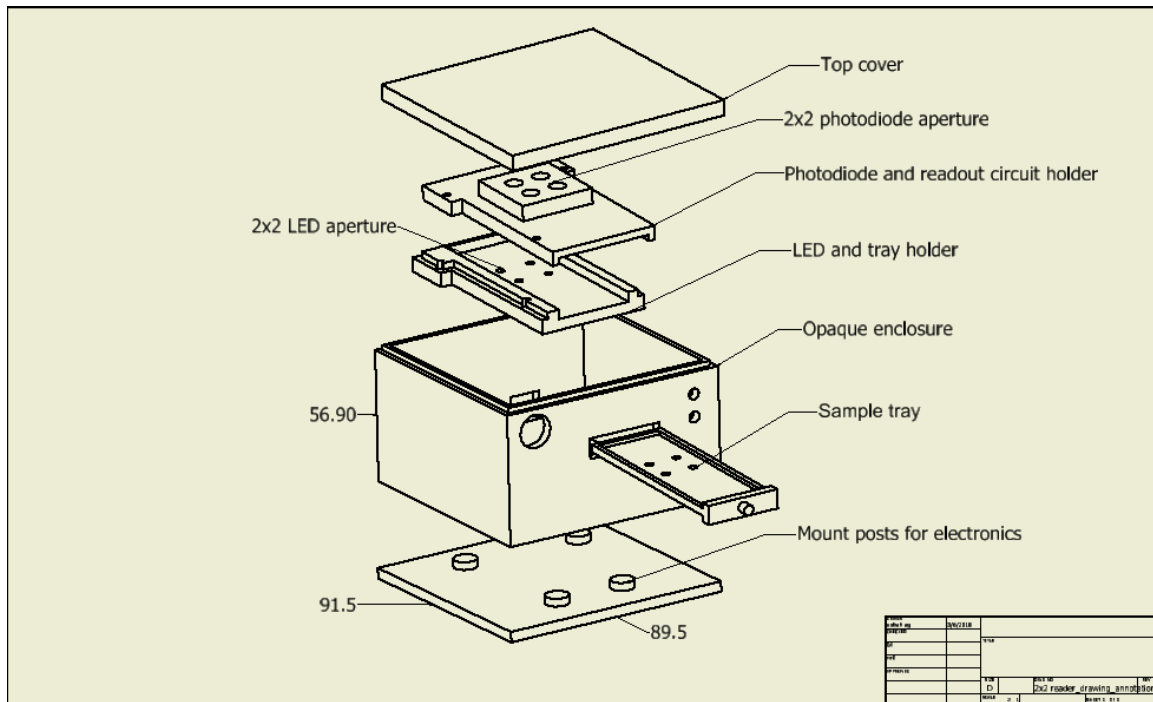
Exploded View Drawing of the 3D Printed Optomechanical Components and Housing.
